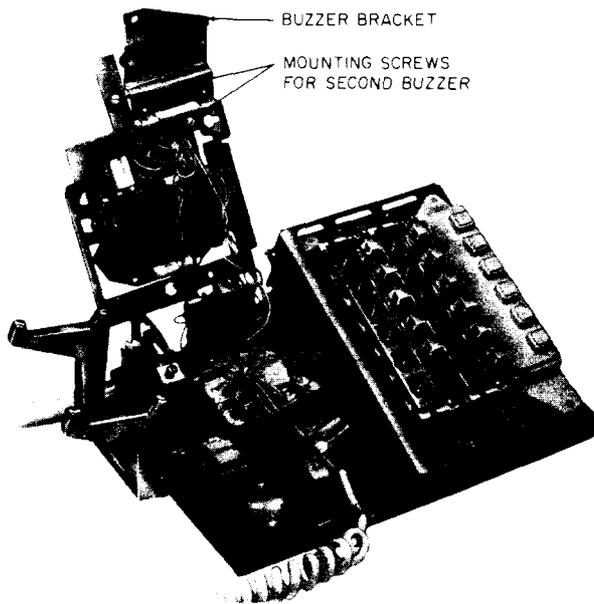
Mounting Location For Second KS-8109L2 Buzzer
